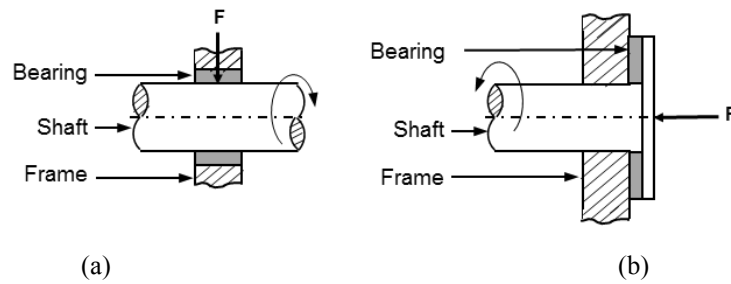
(a) Radial bearing; (b) Thrust bearing.
